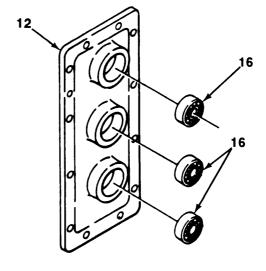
Transmission Gearcase Cover Bearings Replacement.
